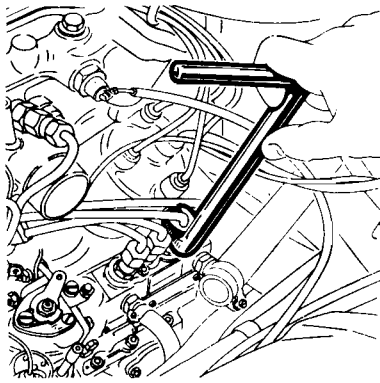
Tool for releasing injection pipe unions (Sec 30)
